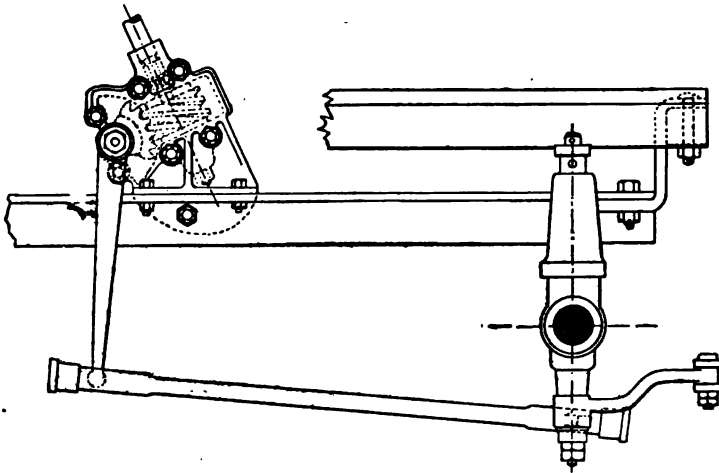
Steering Connections of the Panhard Carriages. The spindle of the steering hand wheel carries a worm gear at its base, which actuates a toothed sector, as shown. This swings an arm and moves the drag-link attached to the arm at the base of the steering head. The transverse drag-link connecting the two steering heads is attached to the arm extending from the front of the carriage. The link between the steering head and the sector arm has ball joints and can adjust the distance as the carriage rises and falls on the springs.
